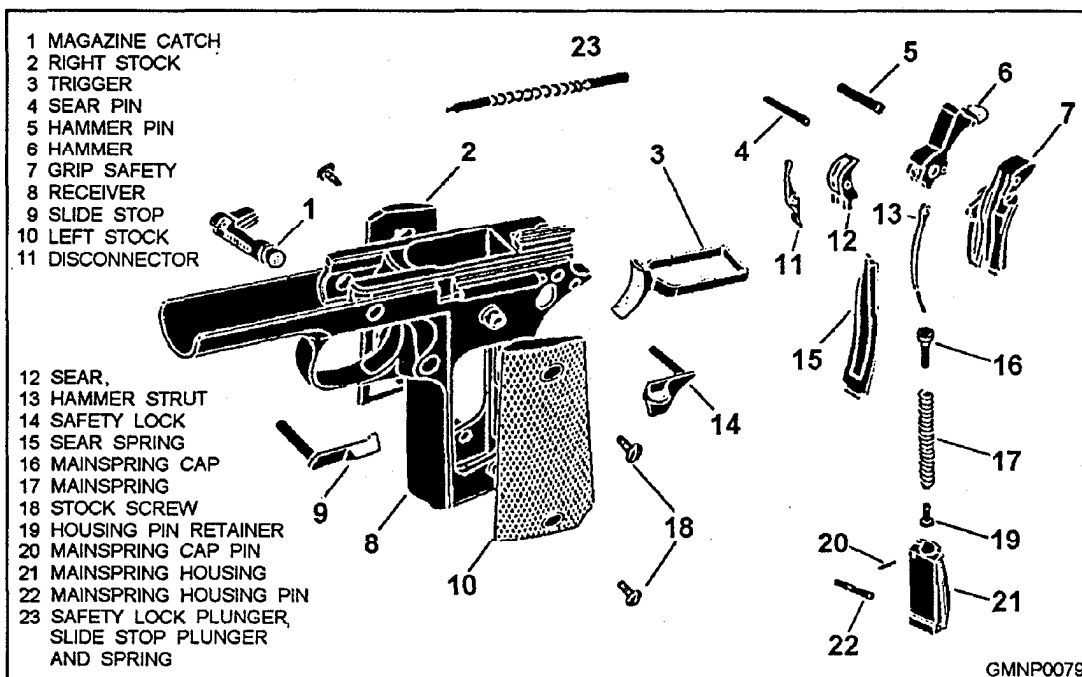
Detailed receiver disassembly of the .45-cal. pistol.
